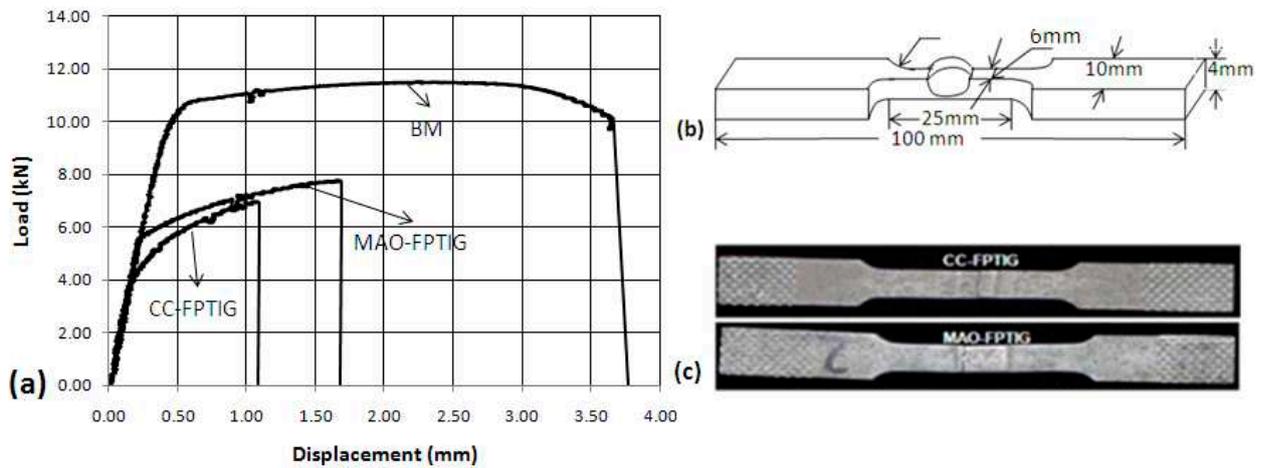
a) Tensile testing results for welds (CC-FPTIG & MAO-FPTIG) and base metal AA2104 T6, b) Sub-size tensile specimen, and c) Location of fracture in AA2014 T6 welds
